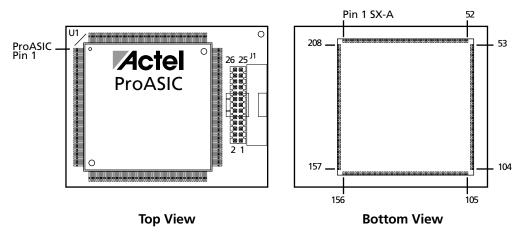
SI-SXA-APAPQ208 Top and Bottom View Drawings
